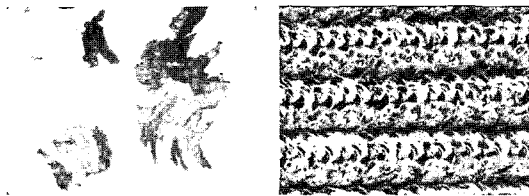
Surface roughness of workpiece for dry and wet cutting
